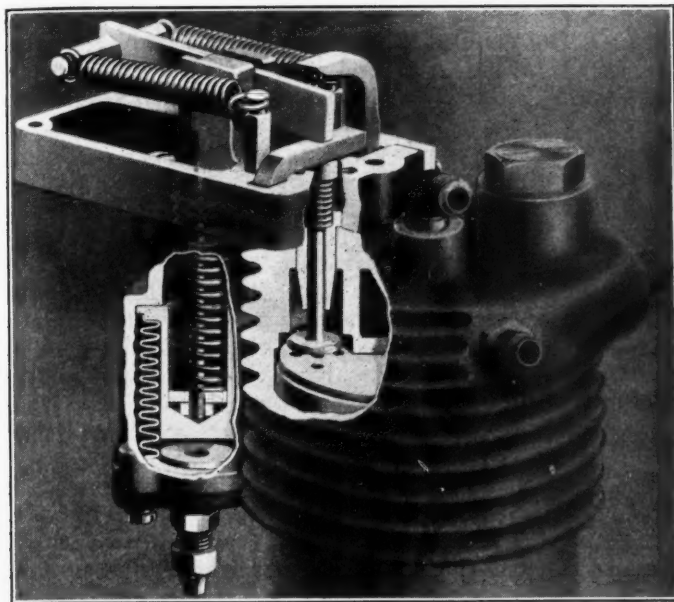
Automotive pressure control valve which is either normally operative or locked in the closed position, thus eliminating valve clatter
